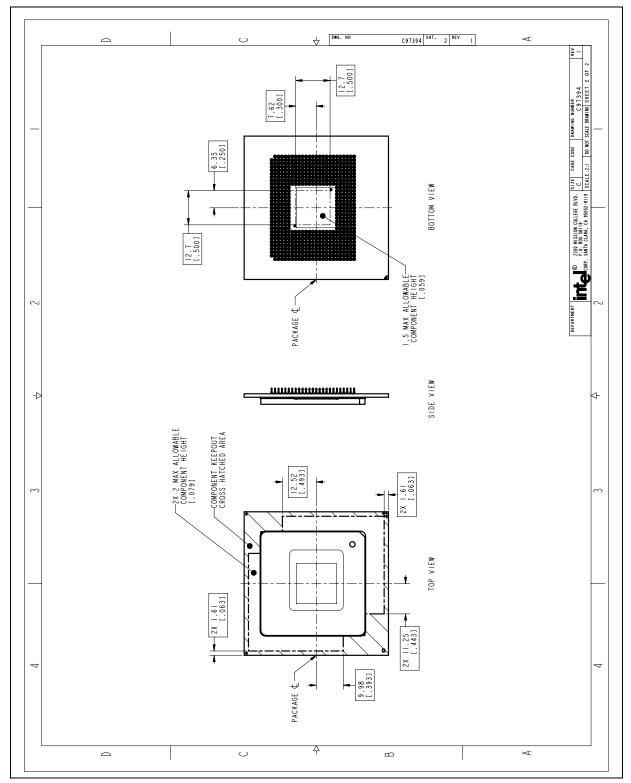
Processor Package Drawing (Sheet 2 of 2)
